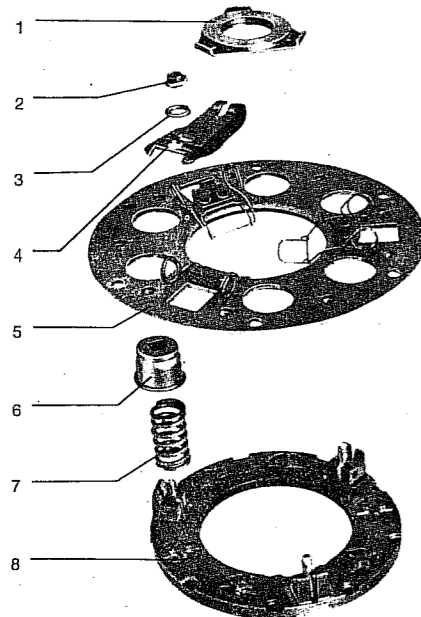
Exploded view of the clutch release pressure plate assembly.
